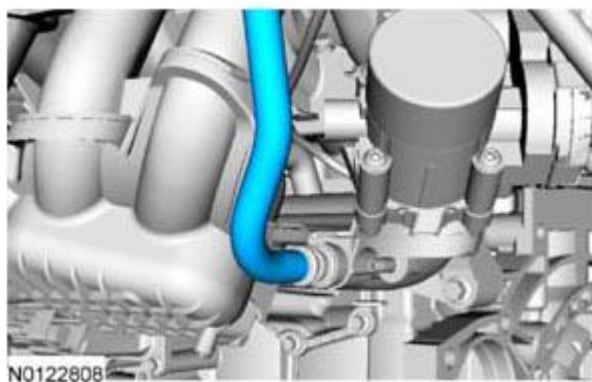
Identifying Brake Booster Vacuum Tube And Intake Manifold
